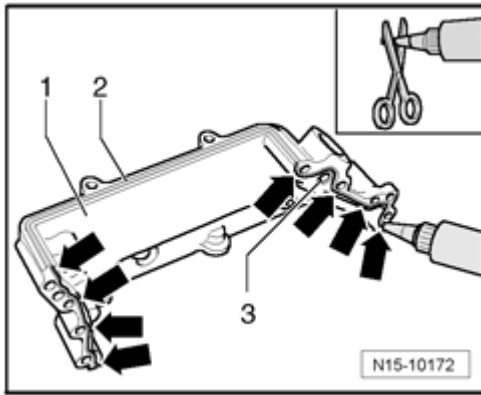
Applying Onto Clean Sealing Surface Of Cover Piece To Cylinder Head And Onto Sealing Surface To Rear Sealing Flange
